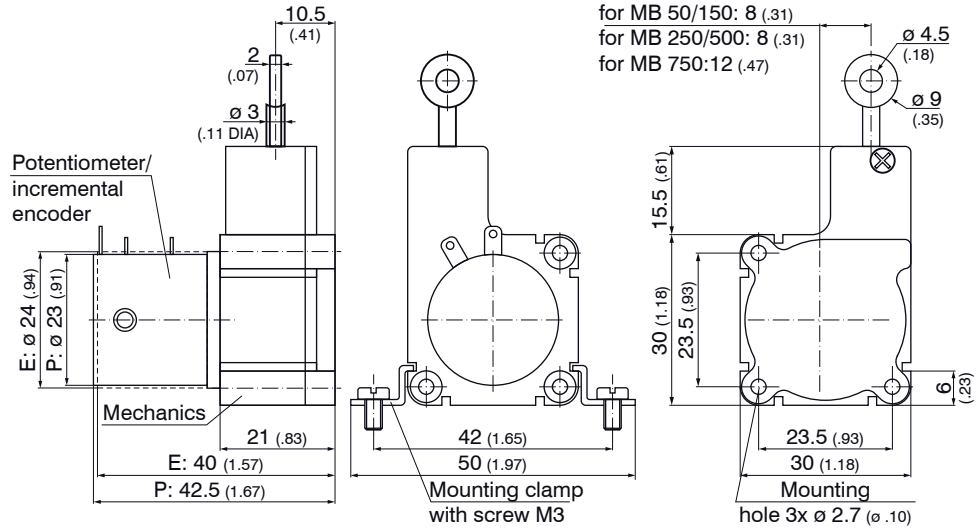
Dimensional drawing WPS- ... -MK30 with potentiometer or encoder, dimensions in mm (inches), not to scale
